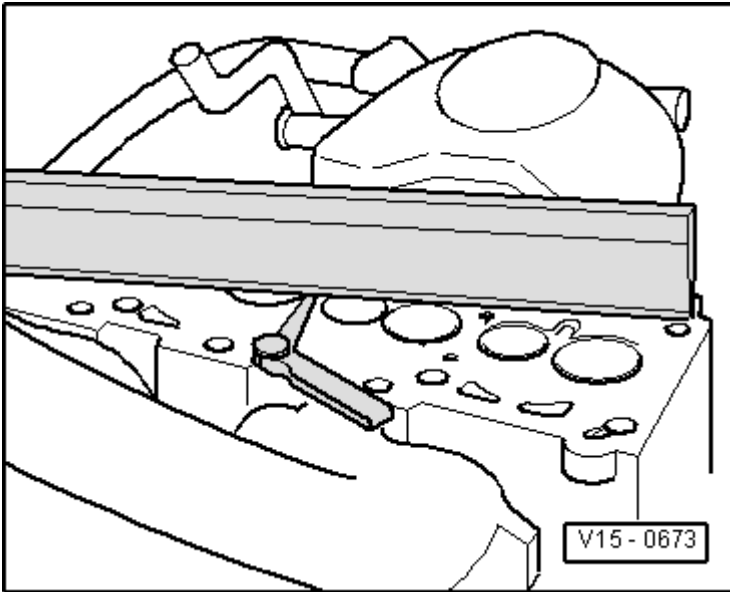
Identifying Check Of Cylinder Head For Distortion
